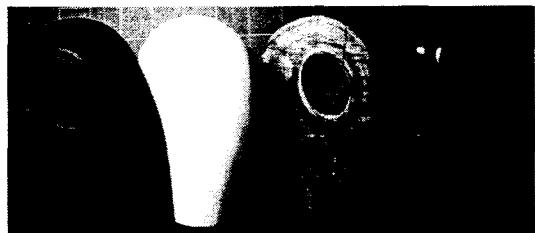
Prototype of auto shift lever knob made by RP process (FDM, LOM, Milling) and real model
